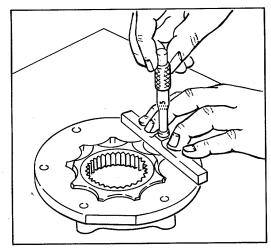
Measuring Clearance from Face of Pump Body to Side of Rotor
